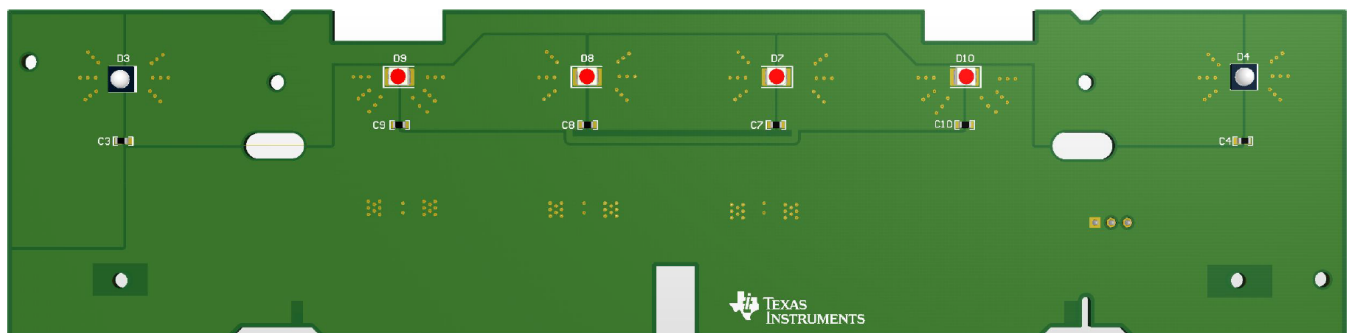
3-D Render of TIDA-01521 PCB (Top View)
